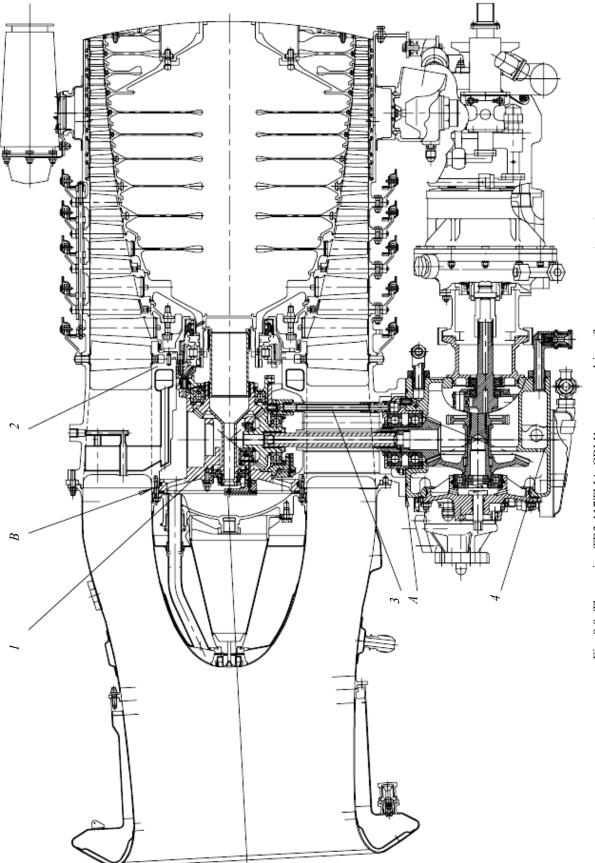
The engine TB3-117TMA-CBM1 accessory drives from gas generator rotor: I -internal drive assembly; 2 - first bearing support housing; 3 - oil bypass pipe; 4 - accessory drive gearbox; 4 - lower flange of first bearing support housing; B - front flange of first bearing support housing
